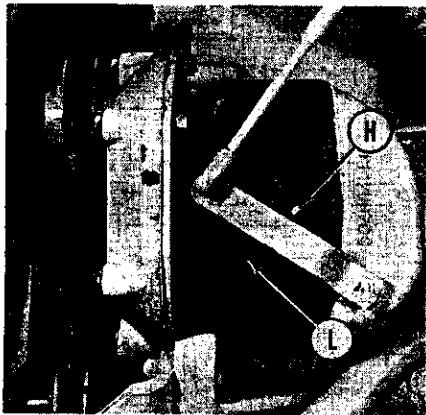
Series B-414 and 354 non-diesel governor which mounts on left side of engine is shown with side cover off. Note high idle (H) and low idle (L) adjusting screws.
